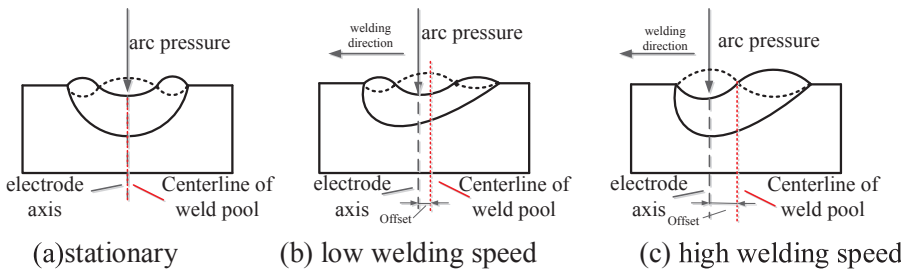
Oscillation mode with different welding speeds. (a) Stationary. (b) Low welding speed. (c) High welding speed.
